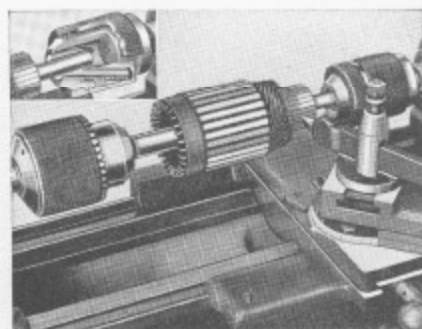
Centerless Armature Mounted in Lathe using Tailstock Adjustable Bushing.
